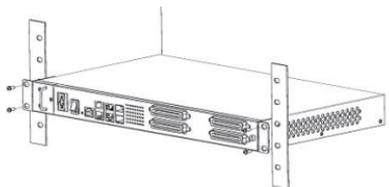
Installing the IP DSLAM in a standard-sized equipment rack
